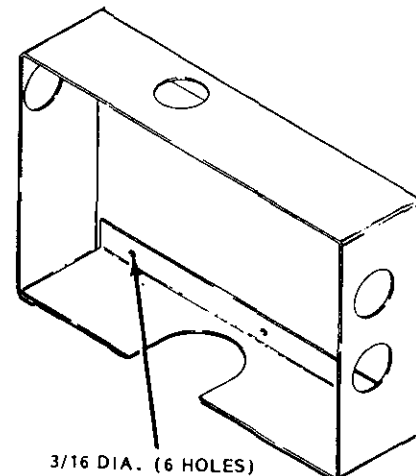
Model MB-P2 Control Head Mounting Bracket
